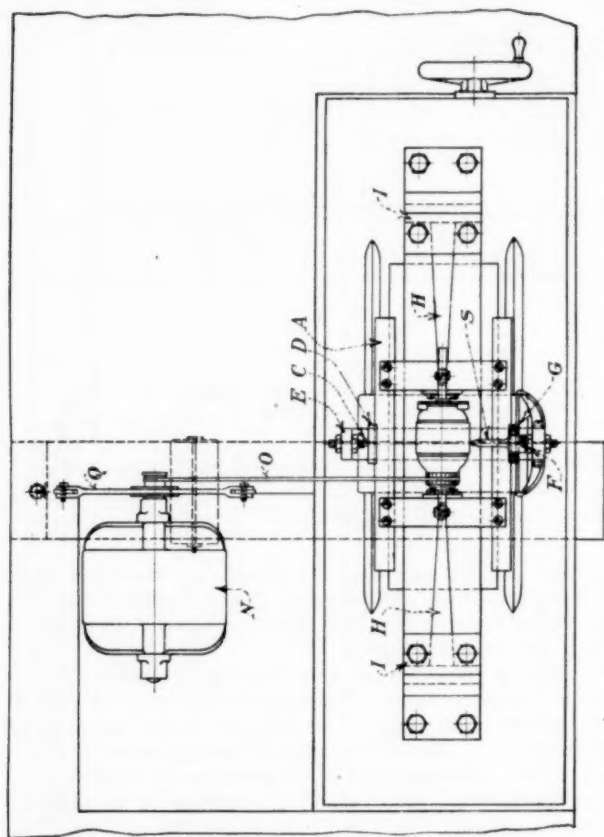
HORIZONTAL VIEW OF BALANCING MACHINE WITH MOVABLE FULCRUM
